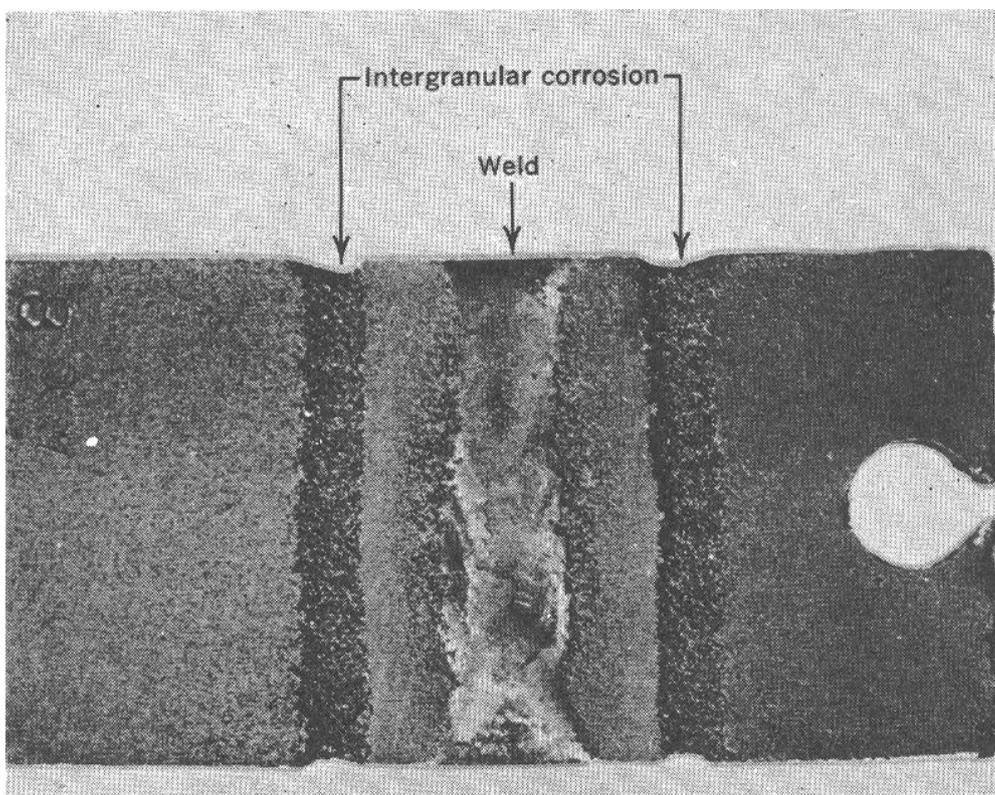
WELD DECAY IN A STAINLESS STEEL
